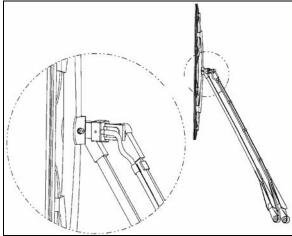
WINDSHIELD WIPER (MOTOR SIDE)
